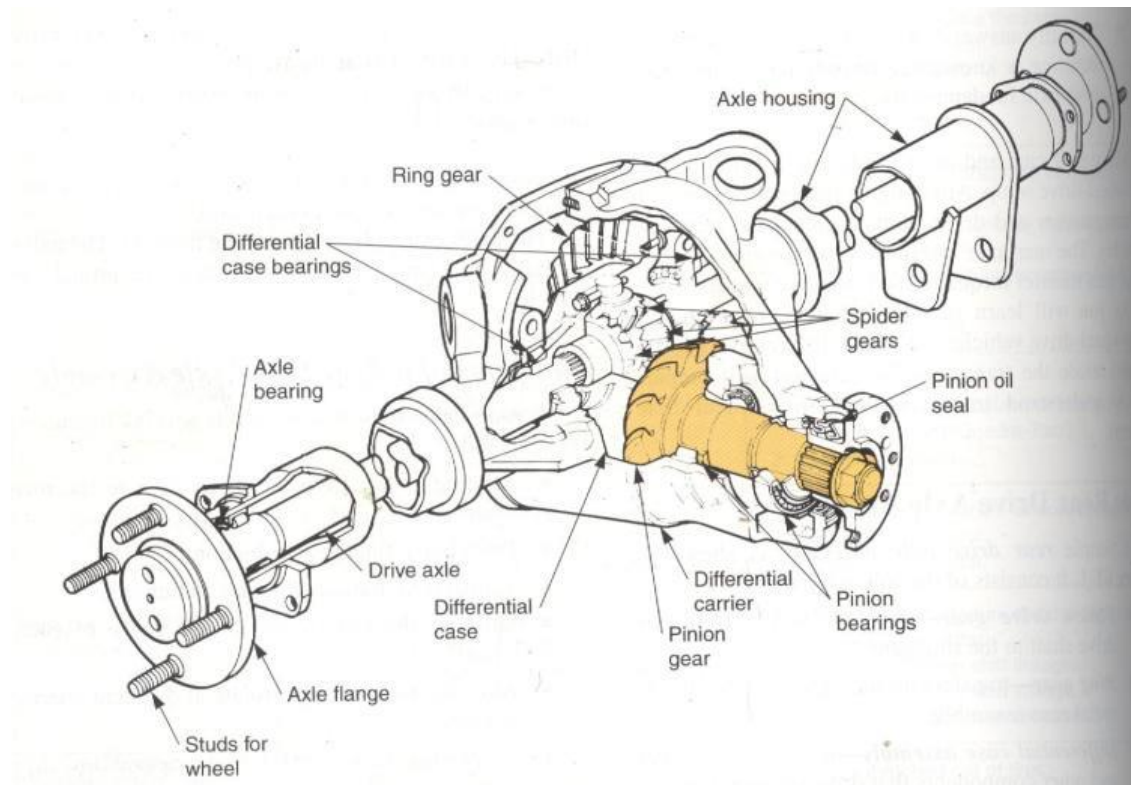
Cutaway shows a detailed view inside the axle housing. The relationship of parts.
